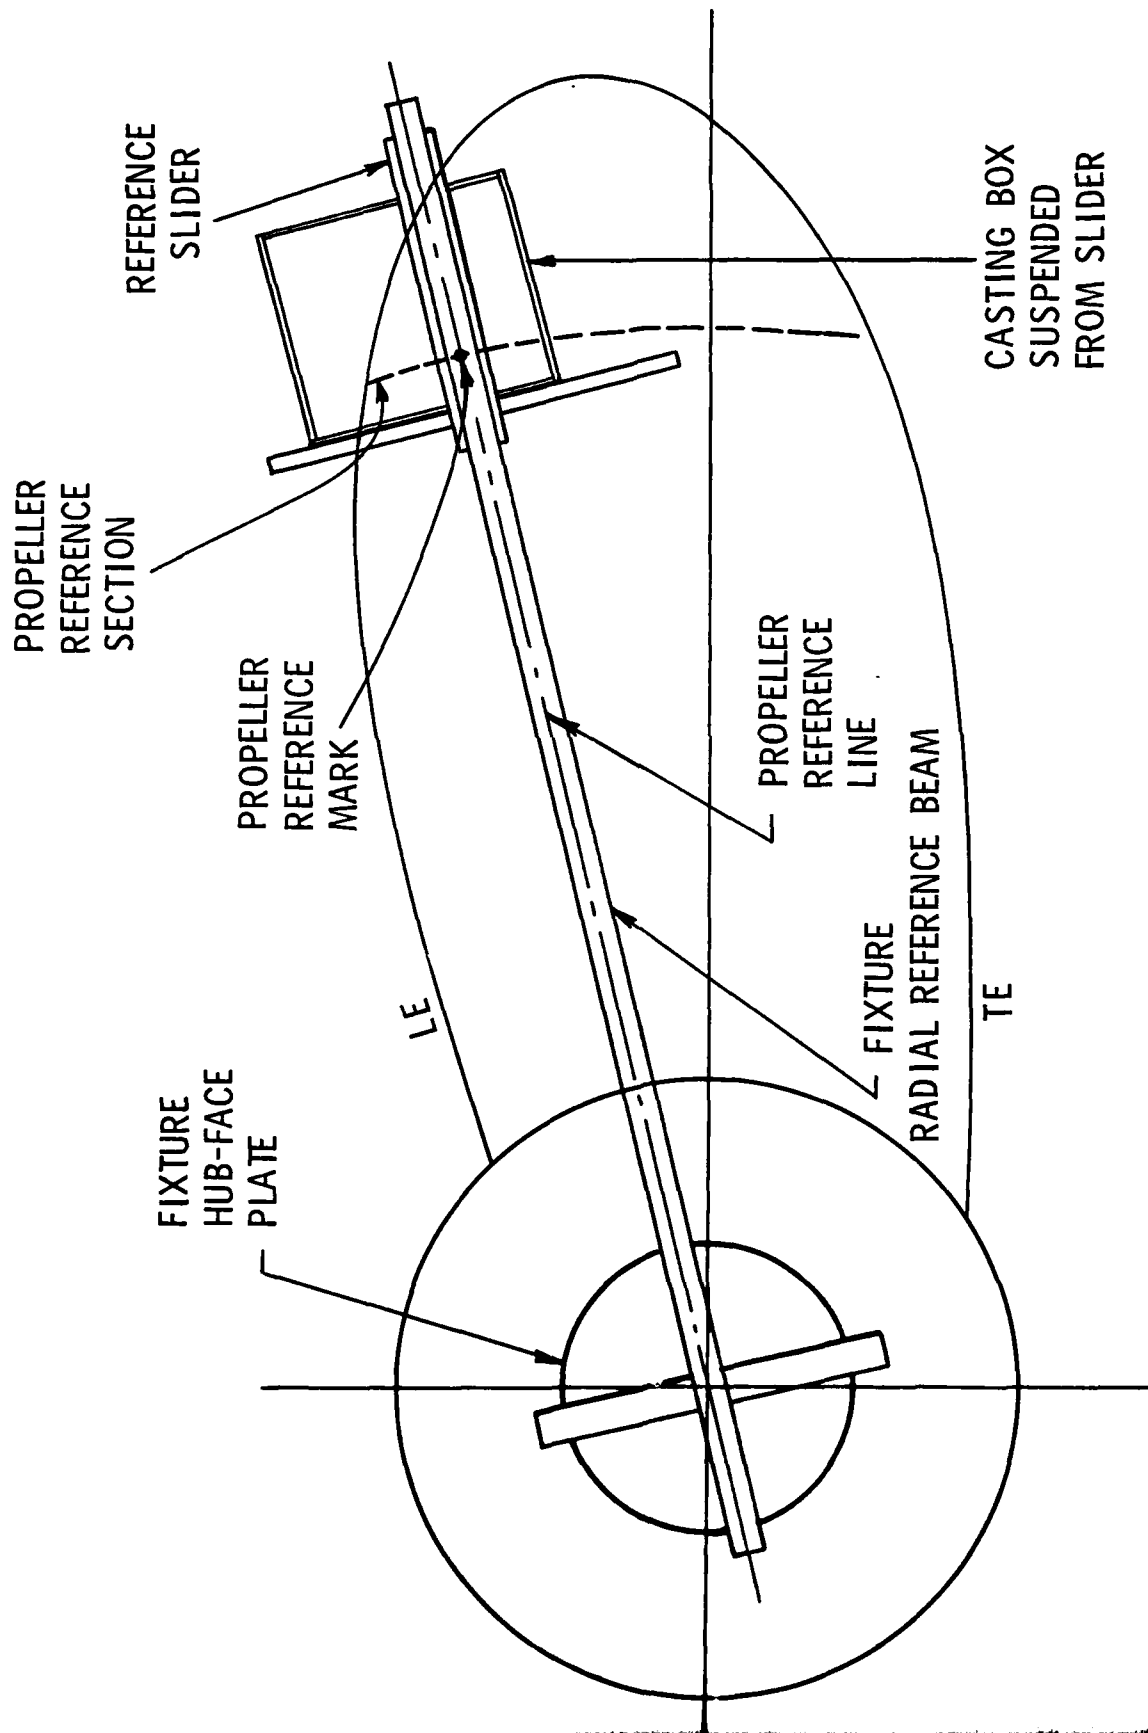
Drawing of Casting Fixture and Box Attached to Hub and Blade
